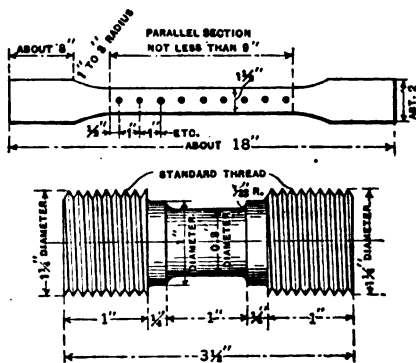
Dimensions of Standard Tension Test Pieces.
